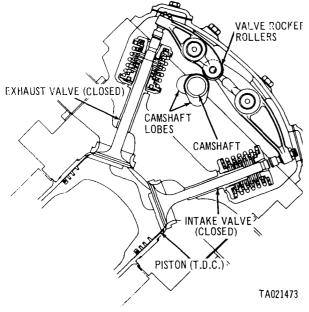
, Position of camshaft lobes with intake and e.chaust valves closed.
